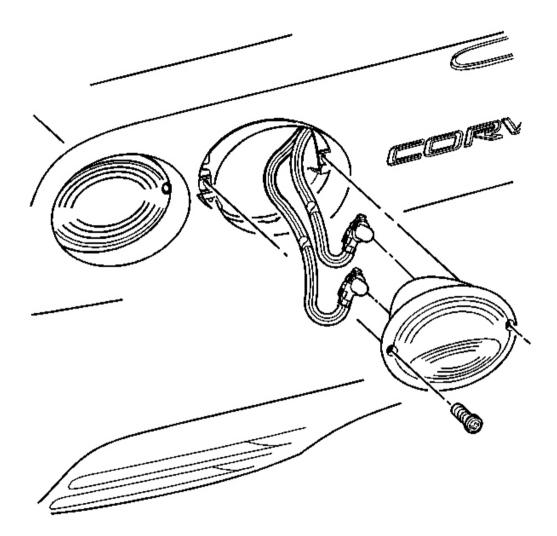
Lamp At Fascia To Tail & Backup Lamp Sockets Courtesy of GENERAL MOTORS CORP.
